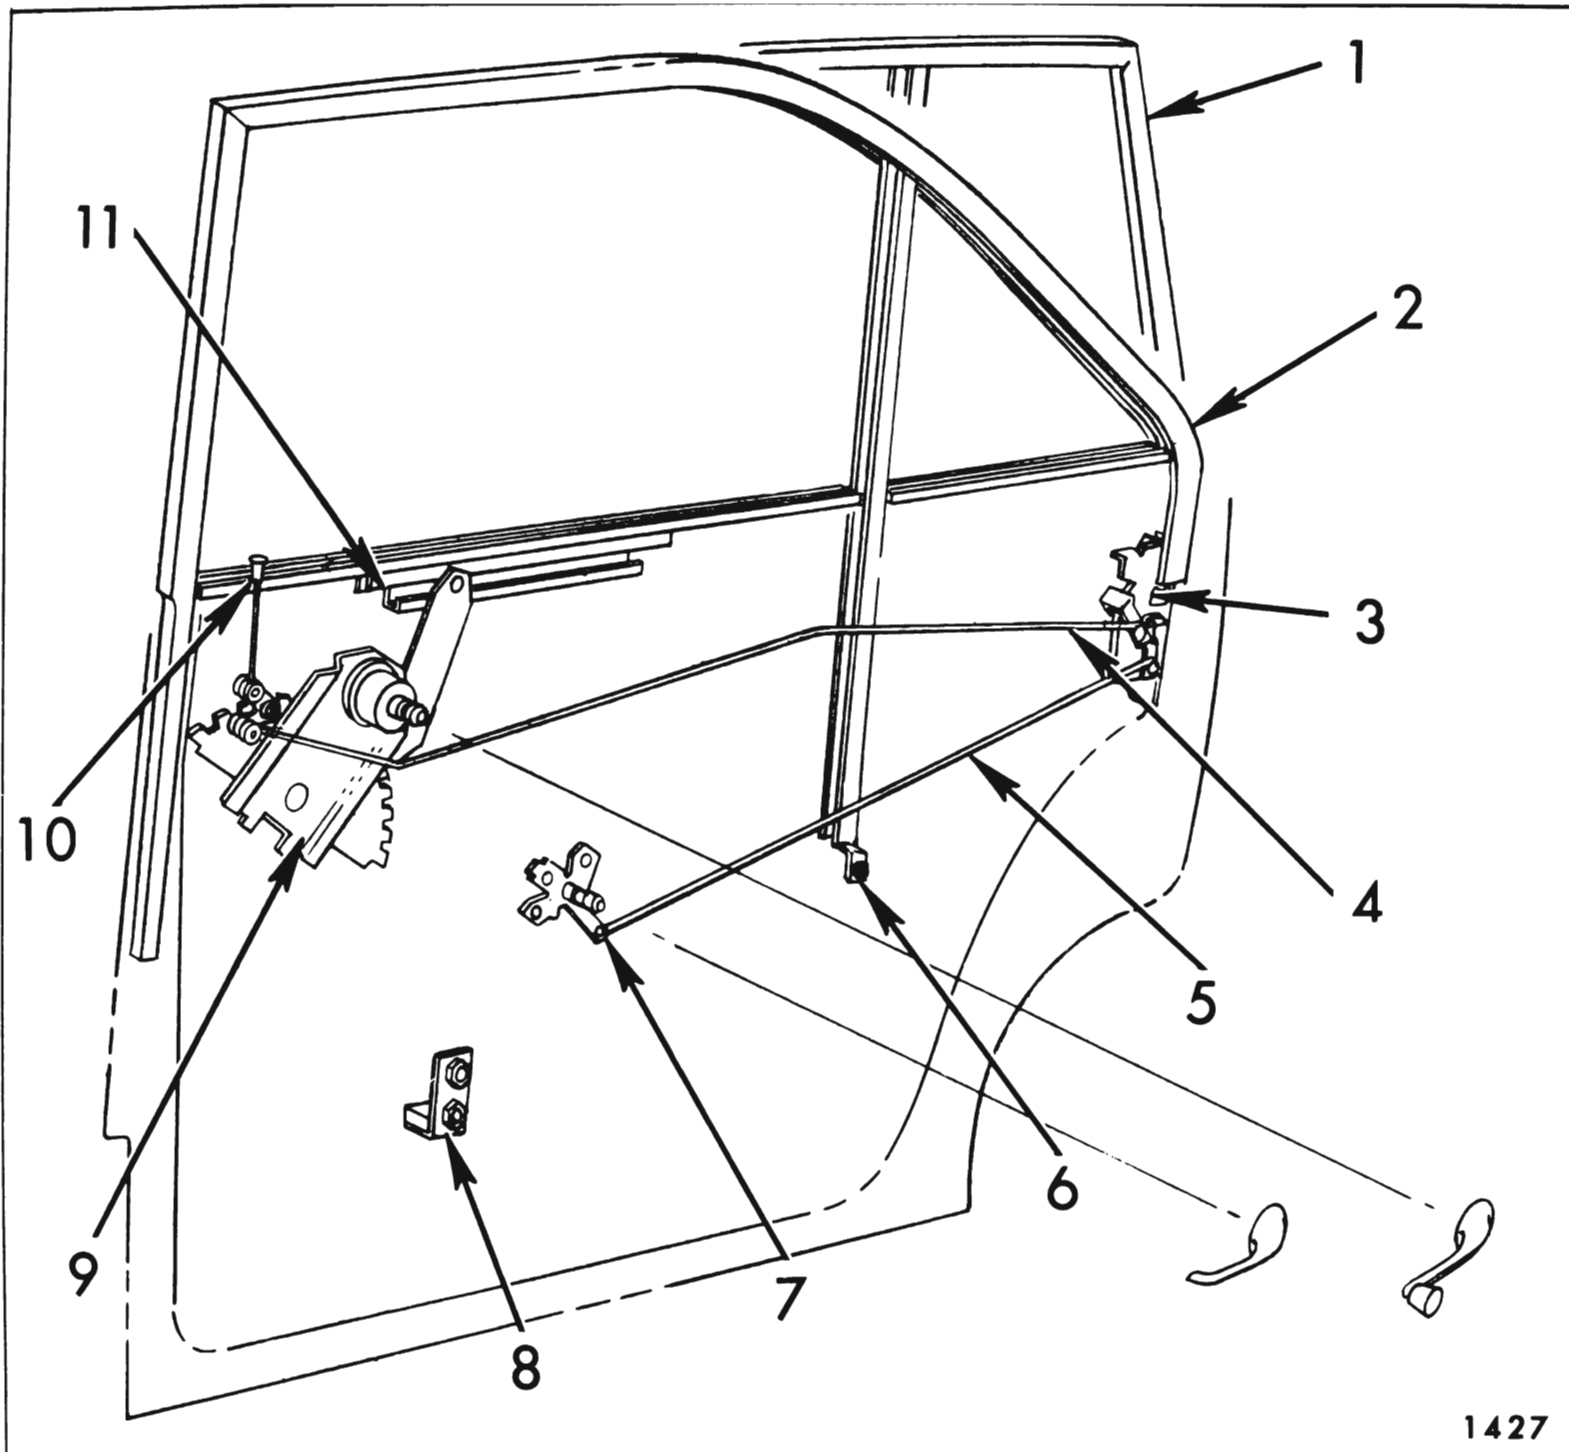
Door Hardware - "X-35 and 69" Styles
